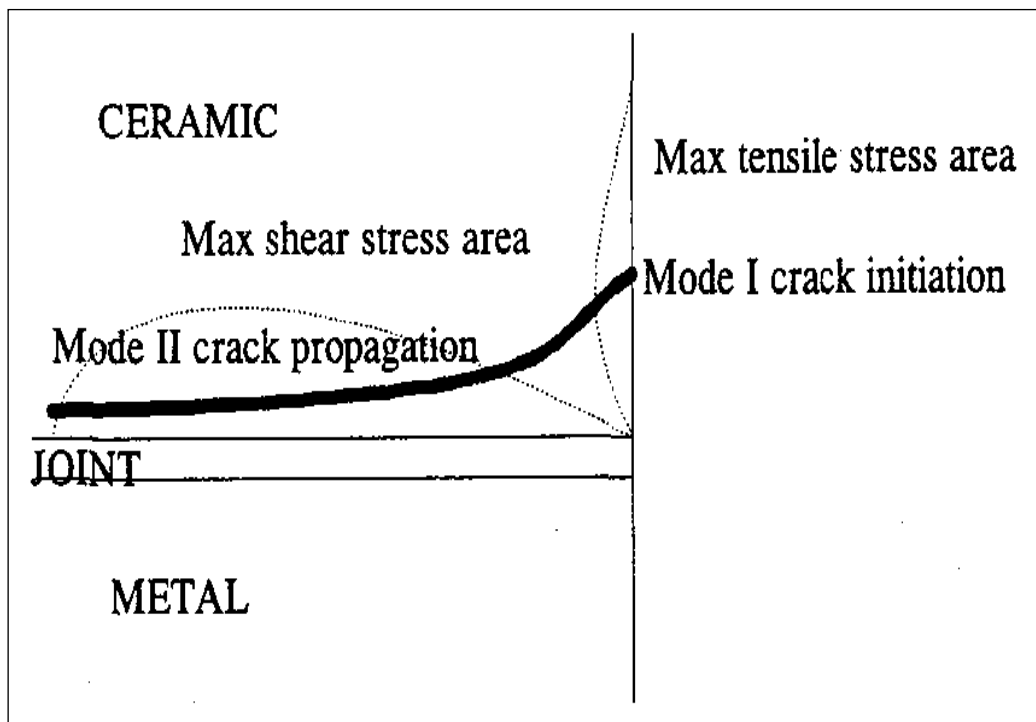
Typical fracture mechanism of a ceramic/metal assembly [57].
